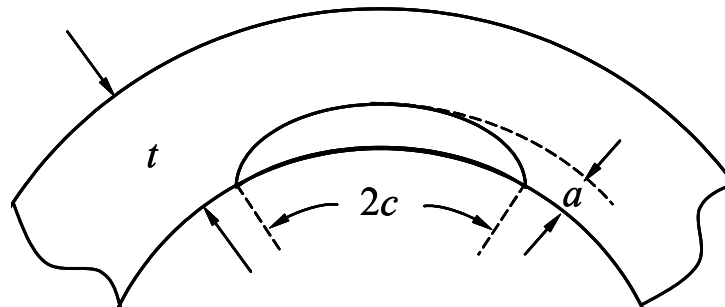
A girth weld with a surface-breaking defect and the relevant dimensions
